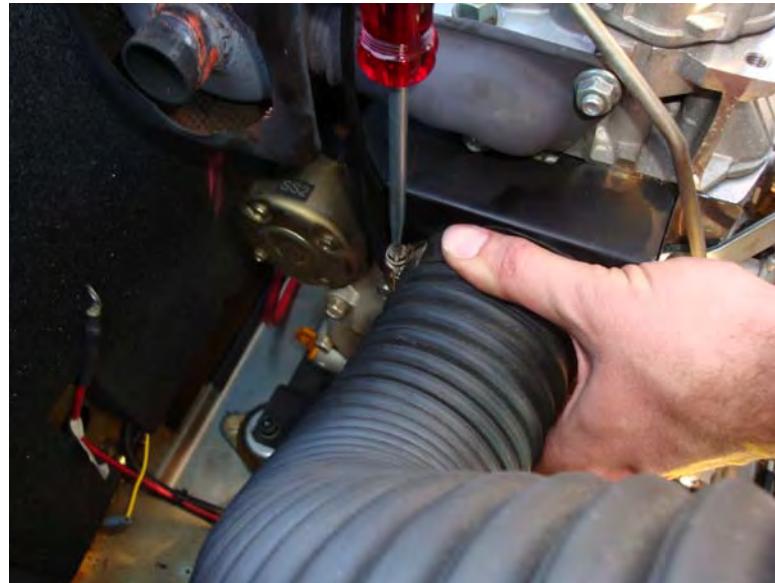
Install Engine Head Cooling Air Inlet Hose.
